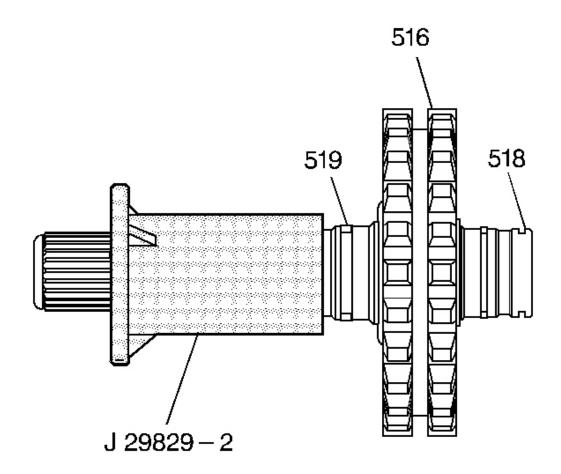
Using J 29829-2 To Size The Turbine Shaft Oil Seal Ring Courtesy of GENERAL MOTORS CORP.
